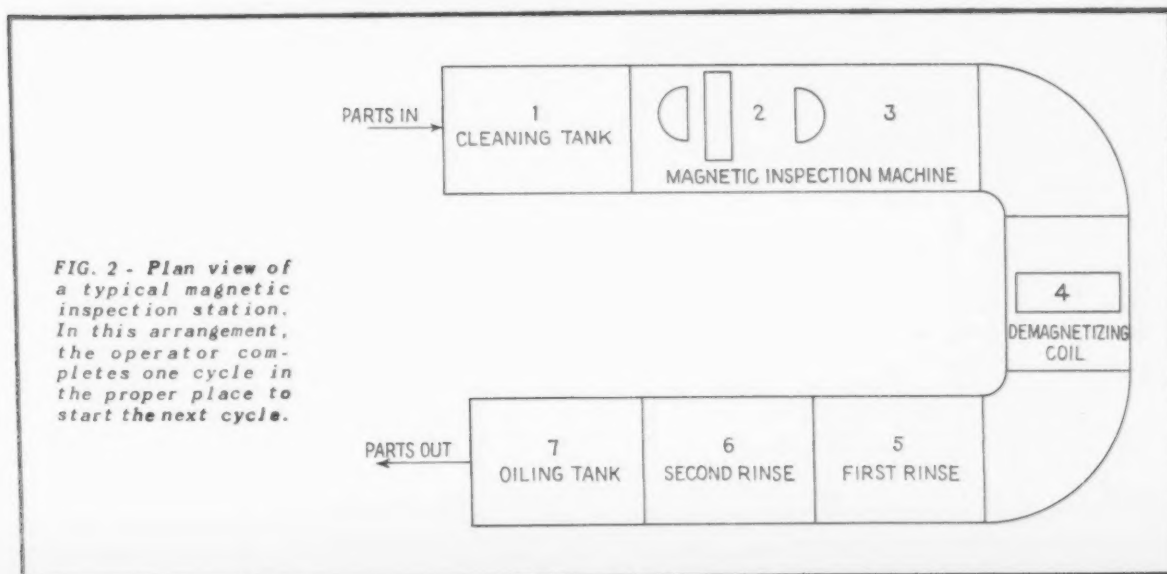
Plan view of a typical magnetic inspection station. In this arrangement, the operator completes one cycle in the proper place to start the next cycle.
